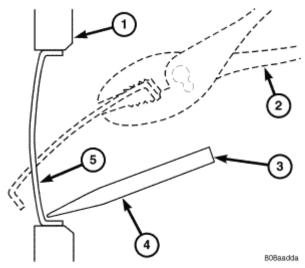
Core Hole Plug Removal Courtesy of CHRYSLER LLC
